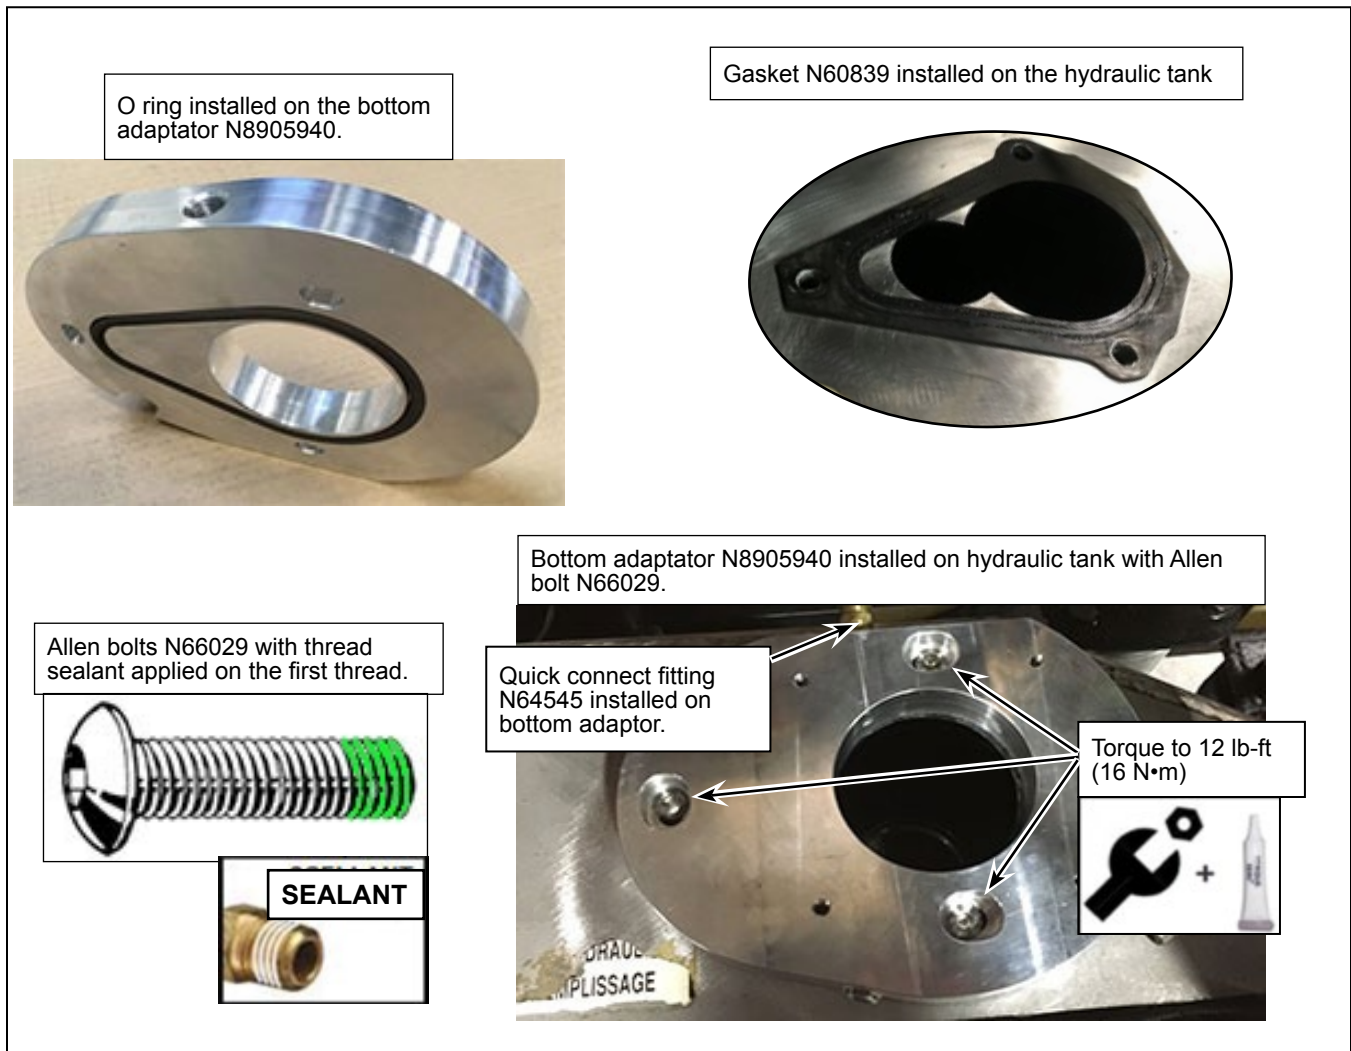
Bottom Adaptor and Remote Breather Quick Connect Fitting on Hydraulic Tank
